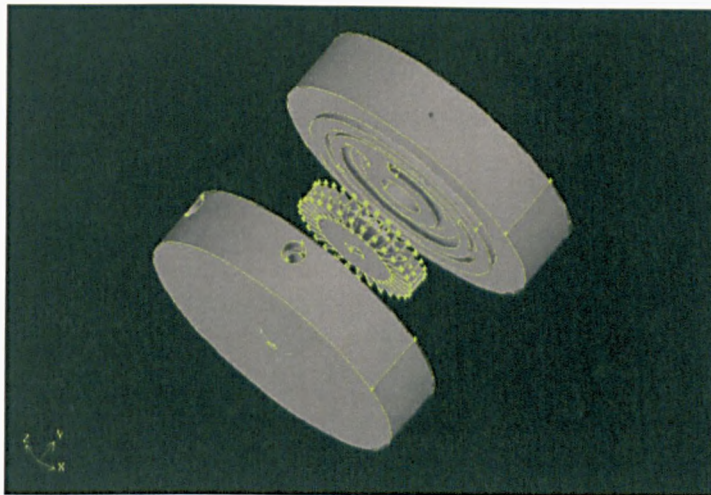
Imported CAD geometry into GAMBIT – exploded view
